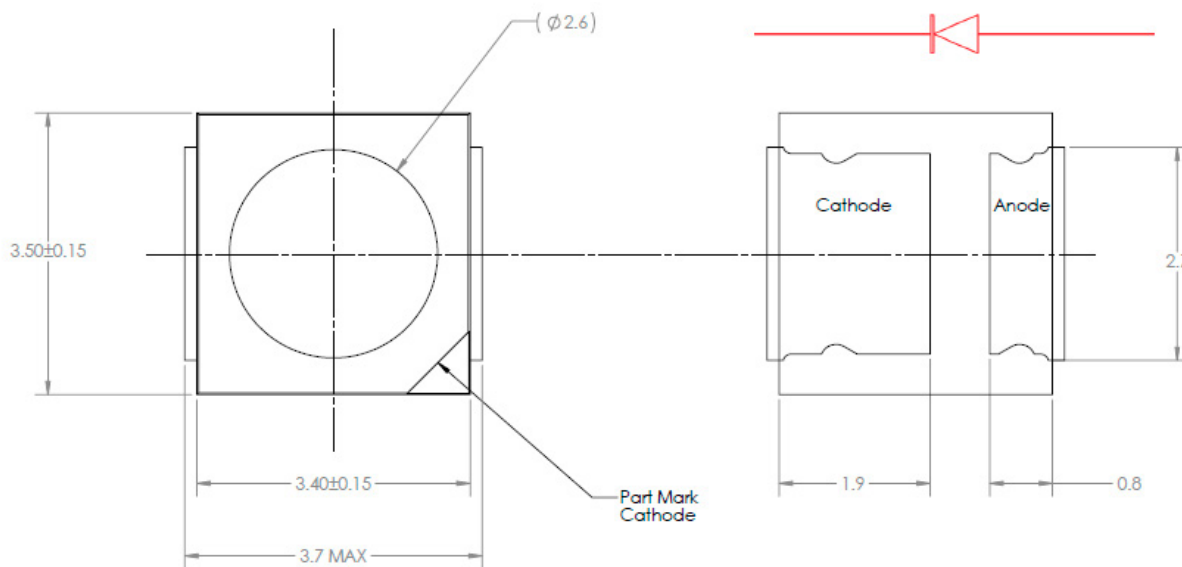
Mechanical dimensions for LUXEON 3535L MXAx-PWxx-S001.
